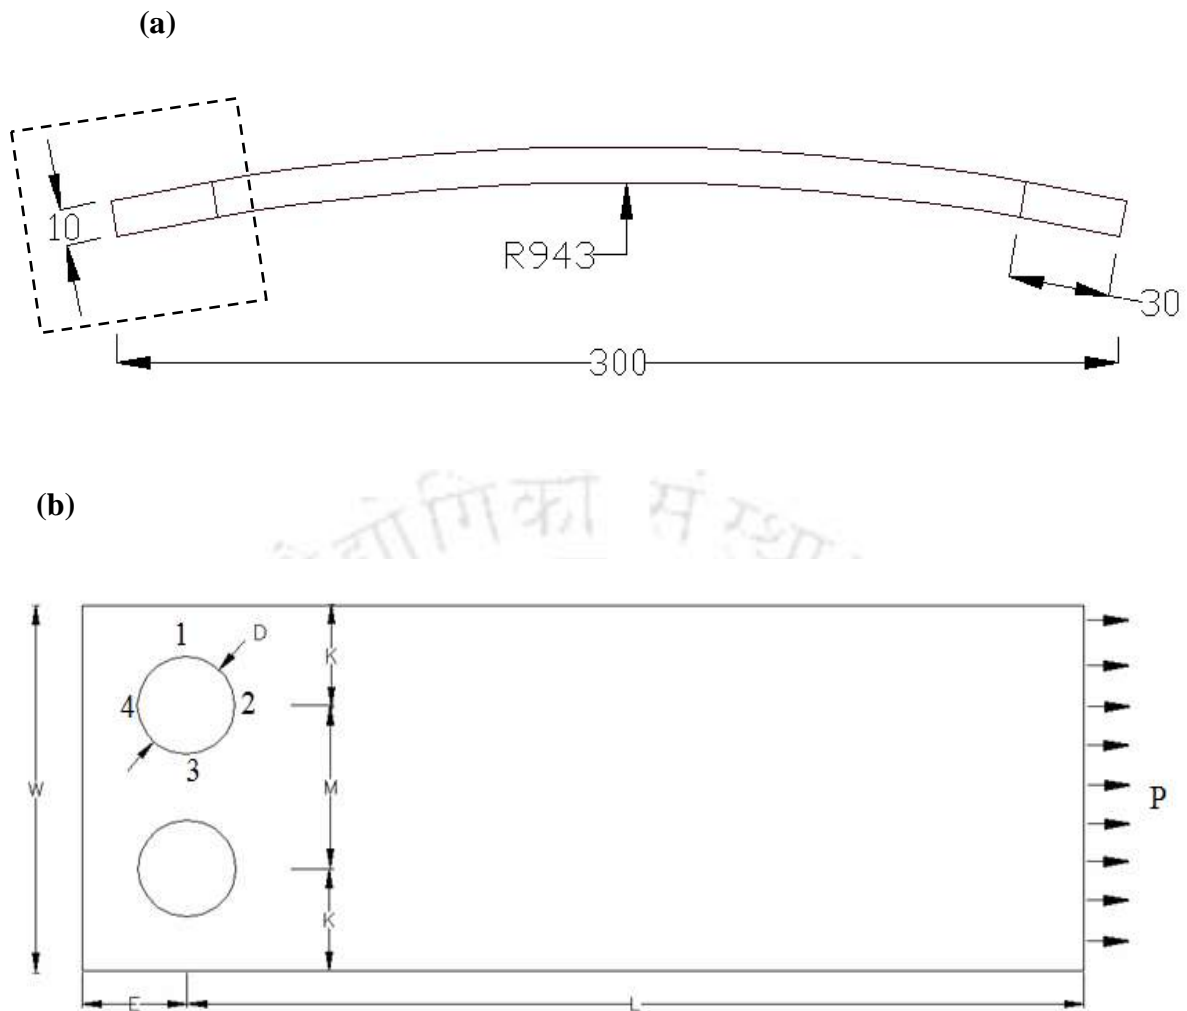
Geometry of molded leaf spring and the proposed joint (a) front view indicating straight portion (marked) (b) sectioned flat portion
